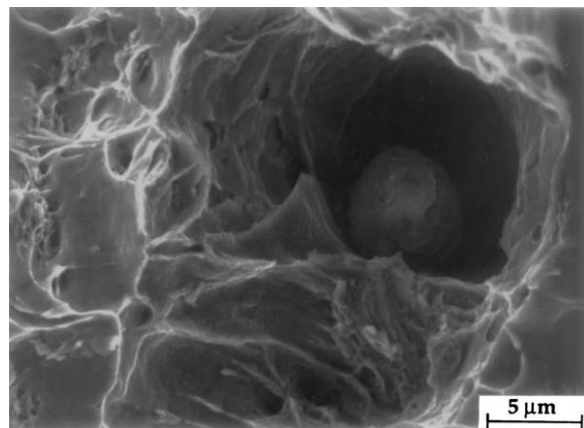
High magnification fractograph of the steel ductile fracture surface. Note the spherical inclusion which nucleated a microvoid [43].
